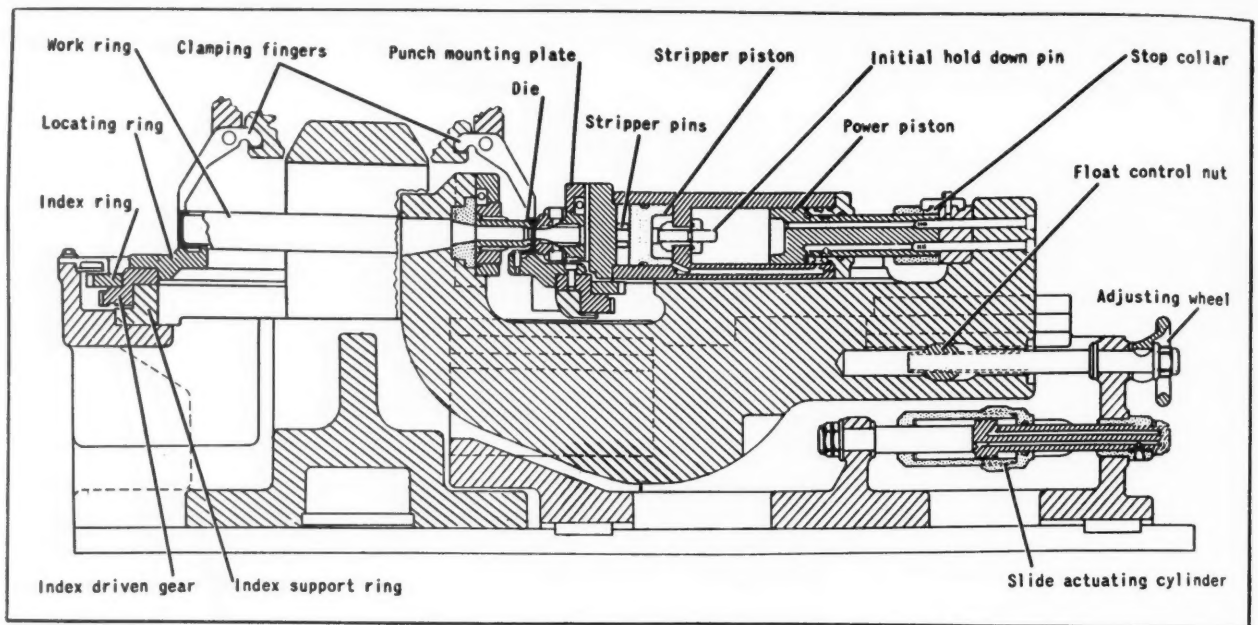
Sectional view through center of punch and actuating cylinder of machine shown in Fig. 1
